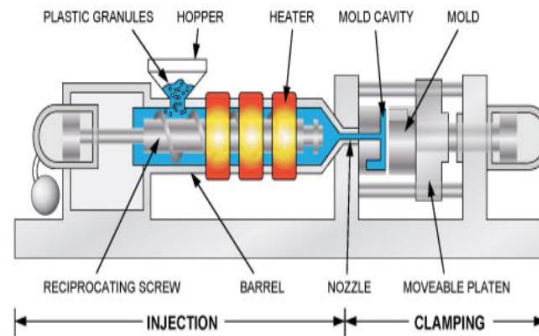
Injection molding machine (Chans Machining, 2024).
